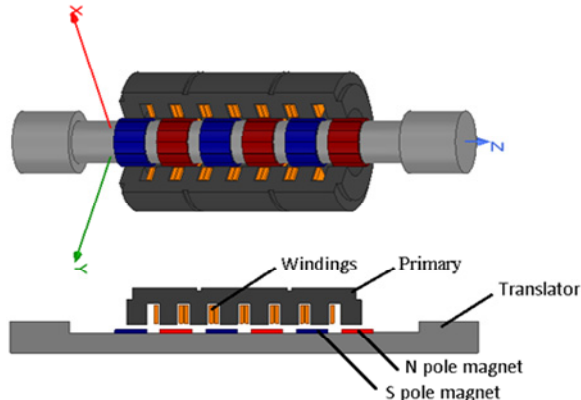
3-D and 2-D views of tube-shaped linear generator
